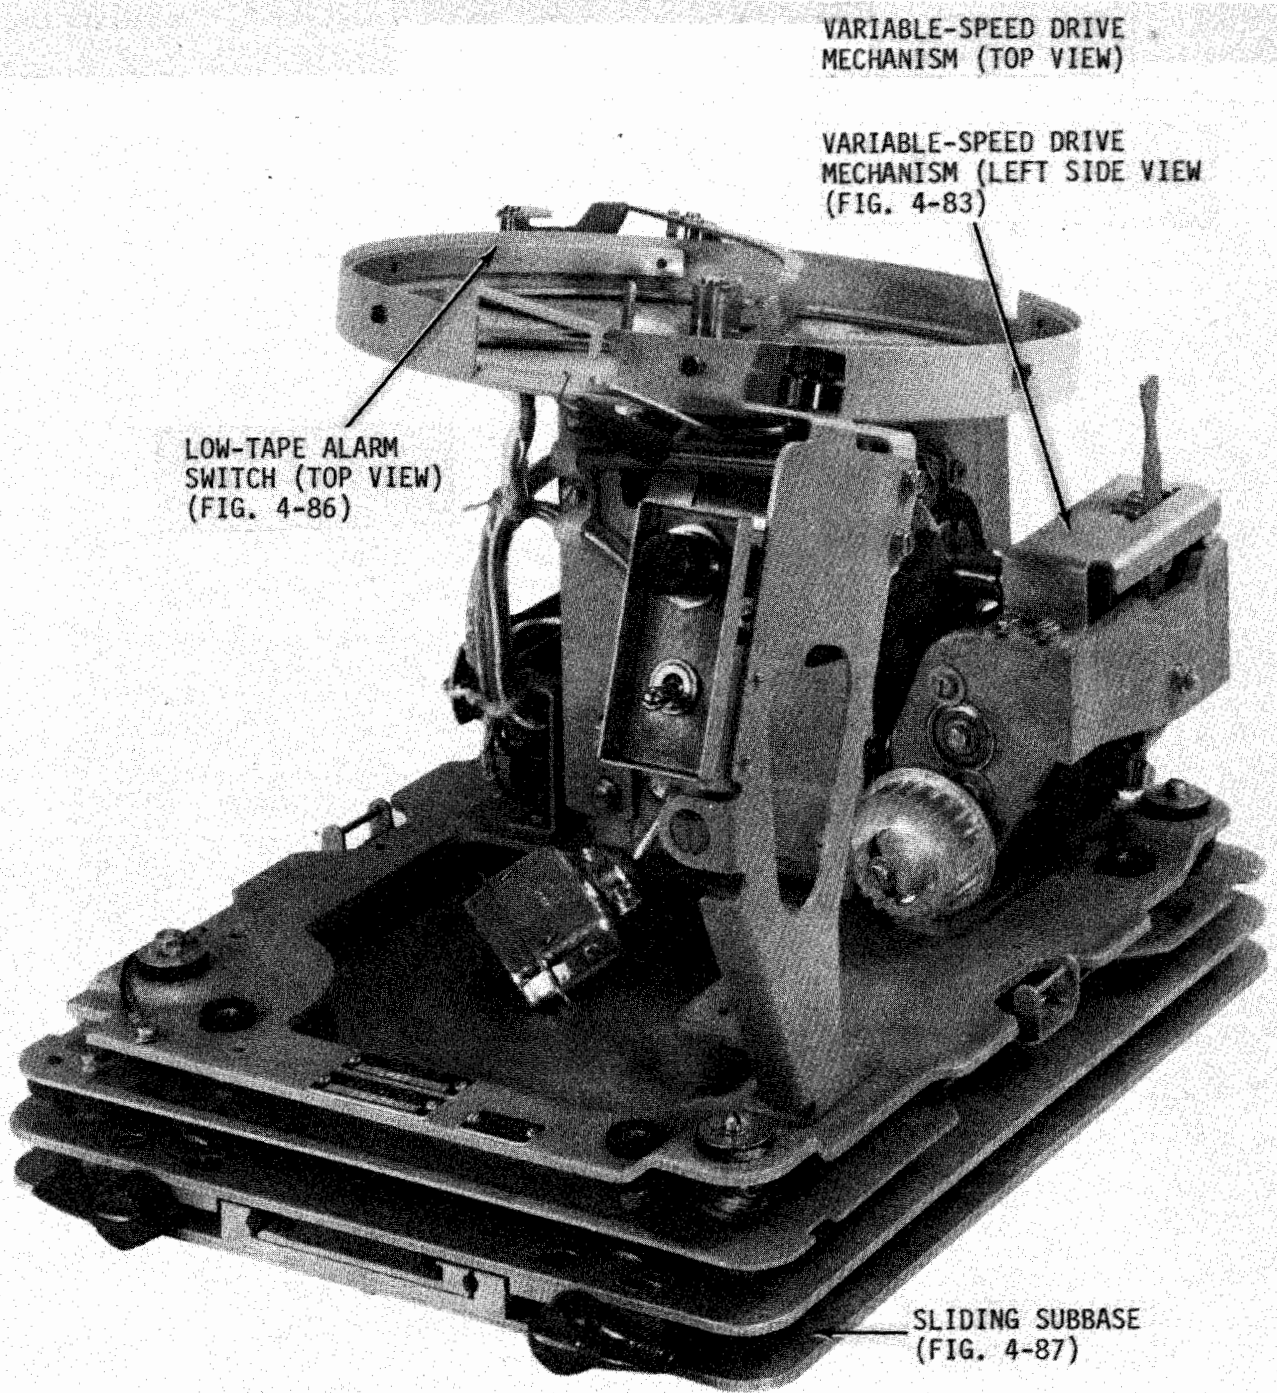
Receive-Only Base and Motor Unit Mounted on a Sliding Subbase
